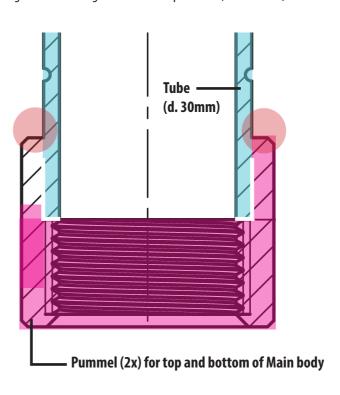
Build-up Main body when prototyping; Red circle are the weld locations; White lines are the hard to clean cavities as these parts cannot be welded shut.
